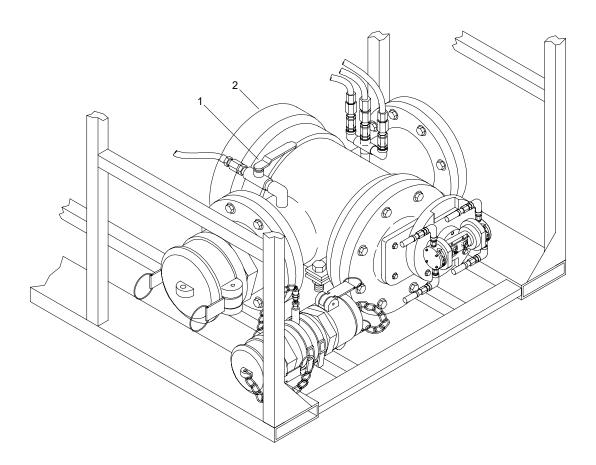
Fuel Priming Valve, Fuel Additive Injector Housing.
